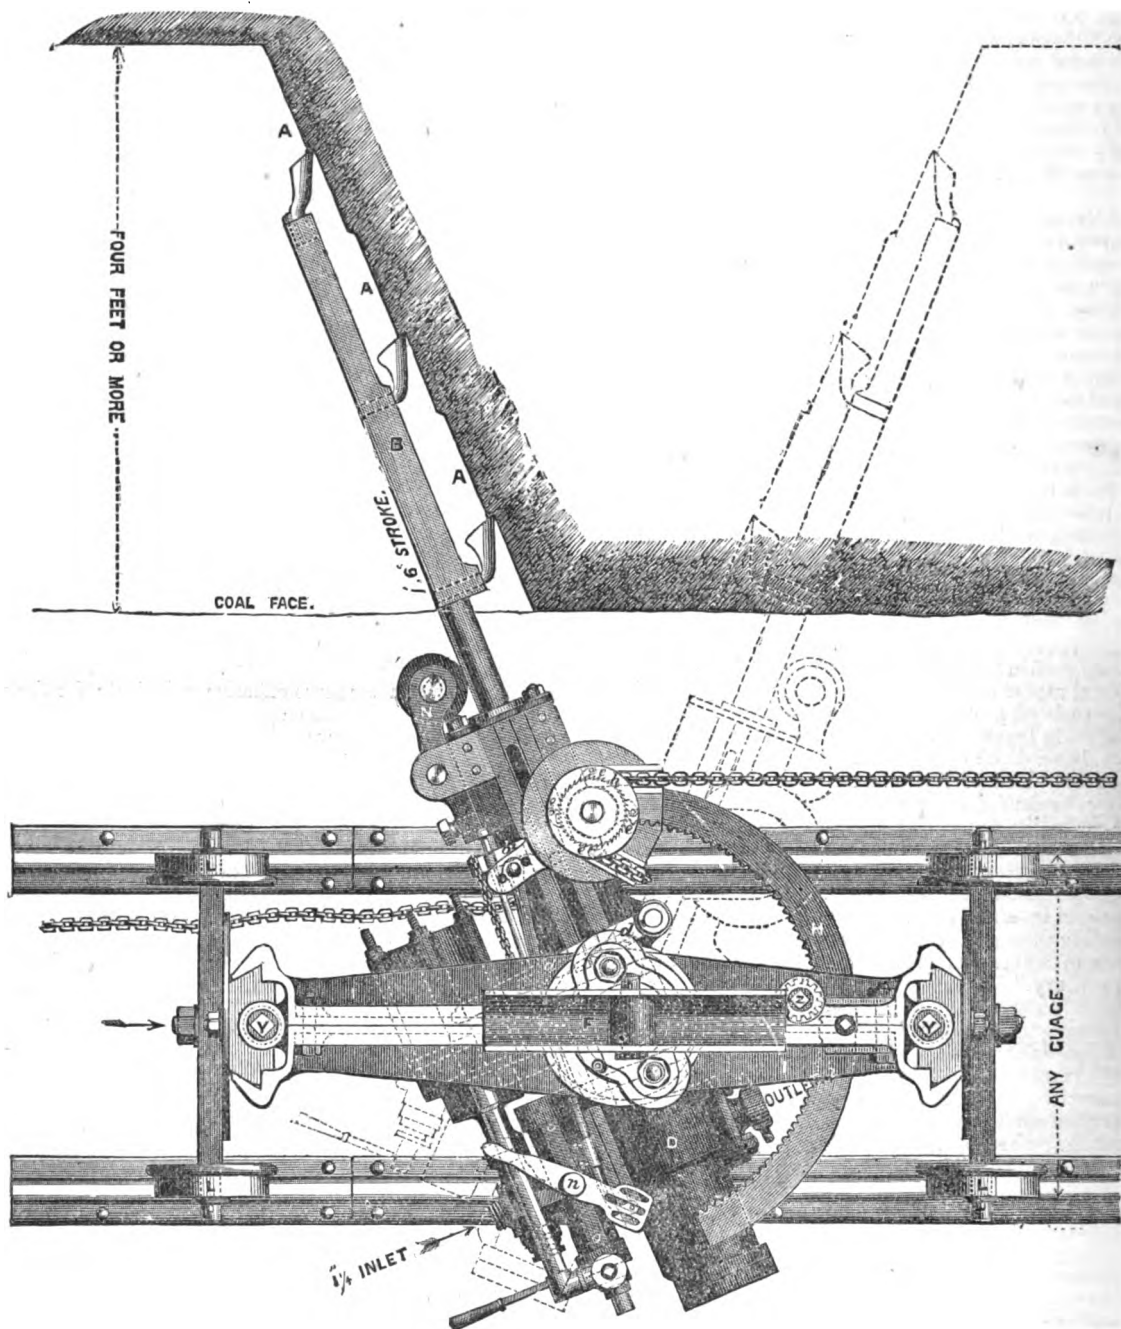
GROUND PLAN. SCALE, $\frac{1}{4}$ INCH TO 1 FOOT.
